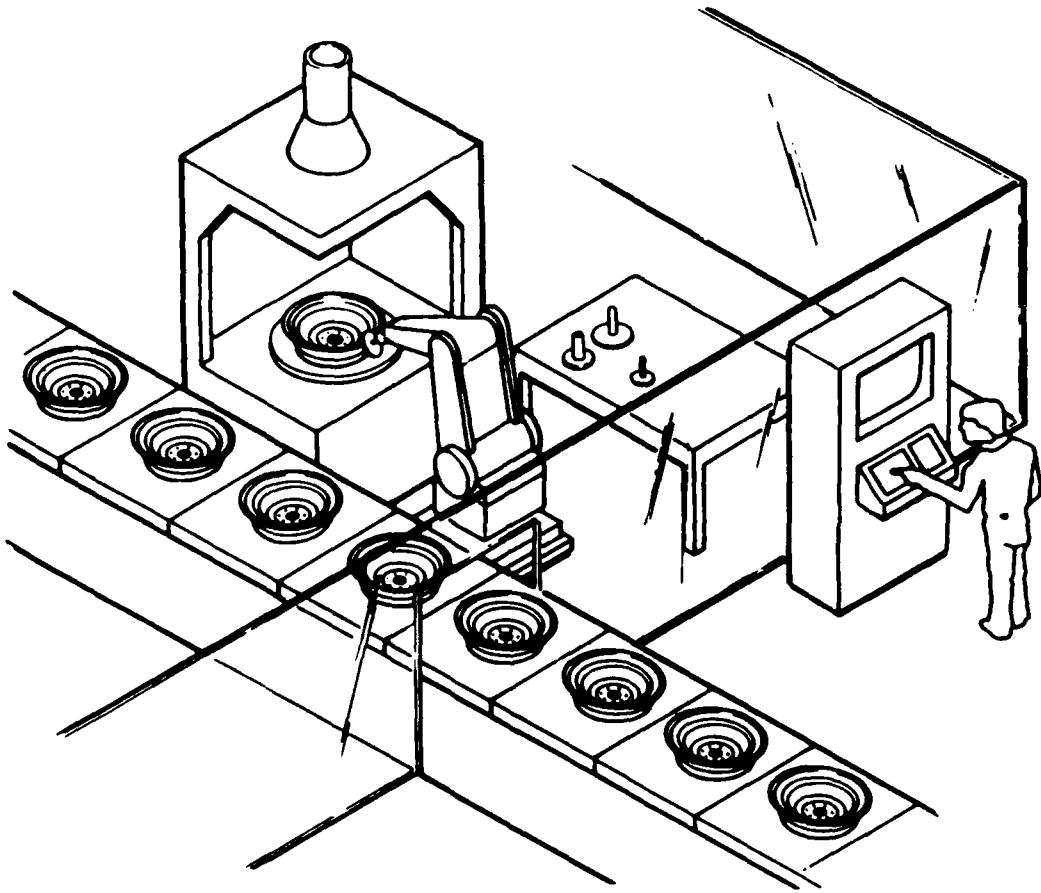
WHEEL DEBURRING SYSTEM. Automating the open loop sanding would automate at least 80 percent of the deburring now being done manually. Initially, one of these deburring workcells should be installed with this system to deburr several of the larger aircraft wheels. As the system becomes more reliable, more wheels can be added to its capacity.
